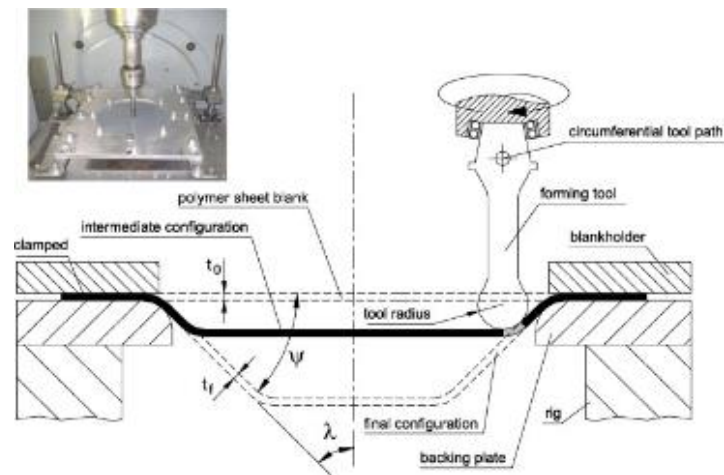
Incremental forming Set-up and Variables involved in the process such as tool radius, angle wall, initial thickness, final thickness, and tool path [102].
